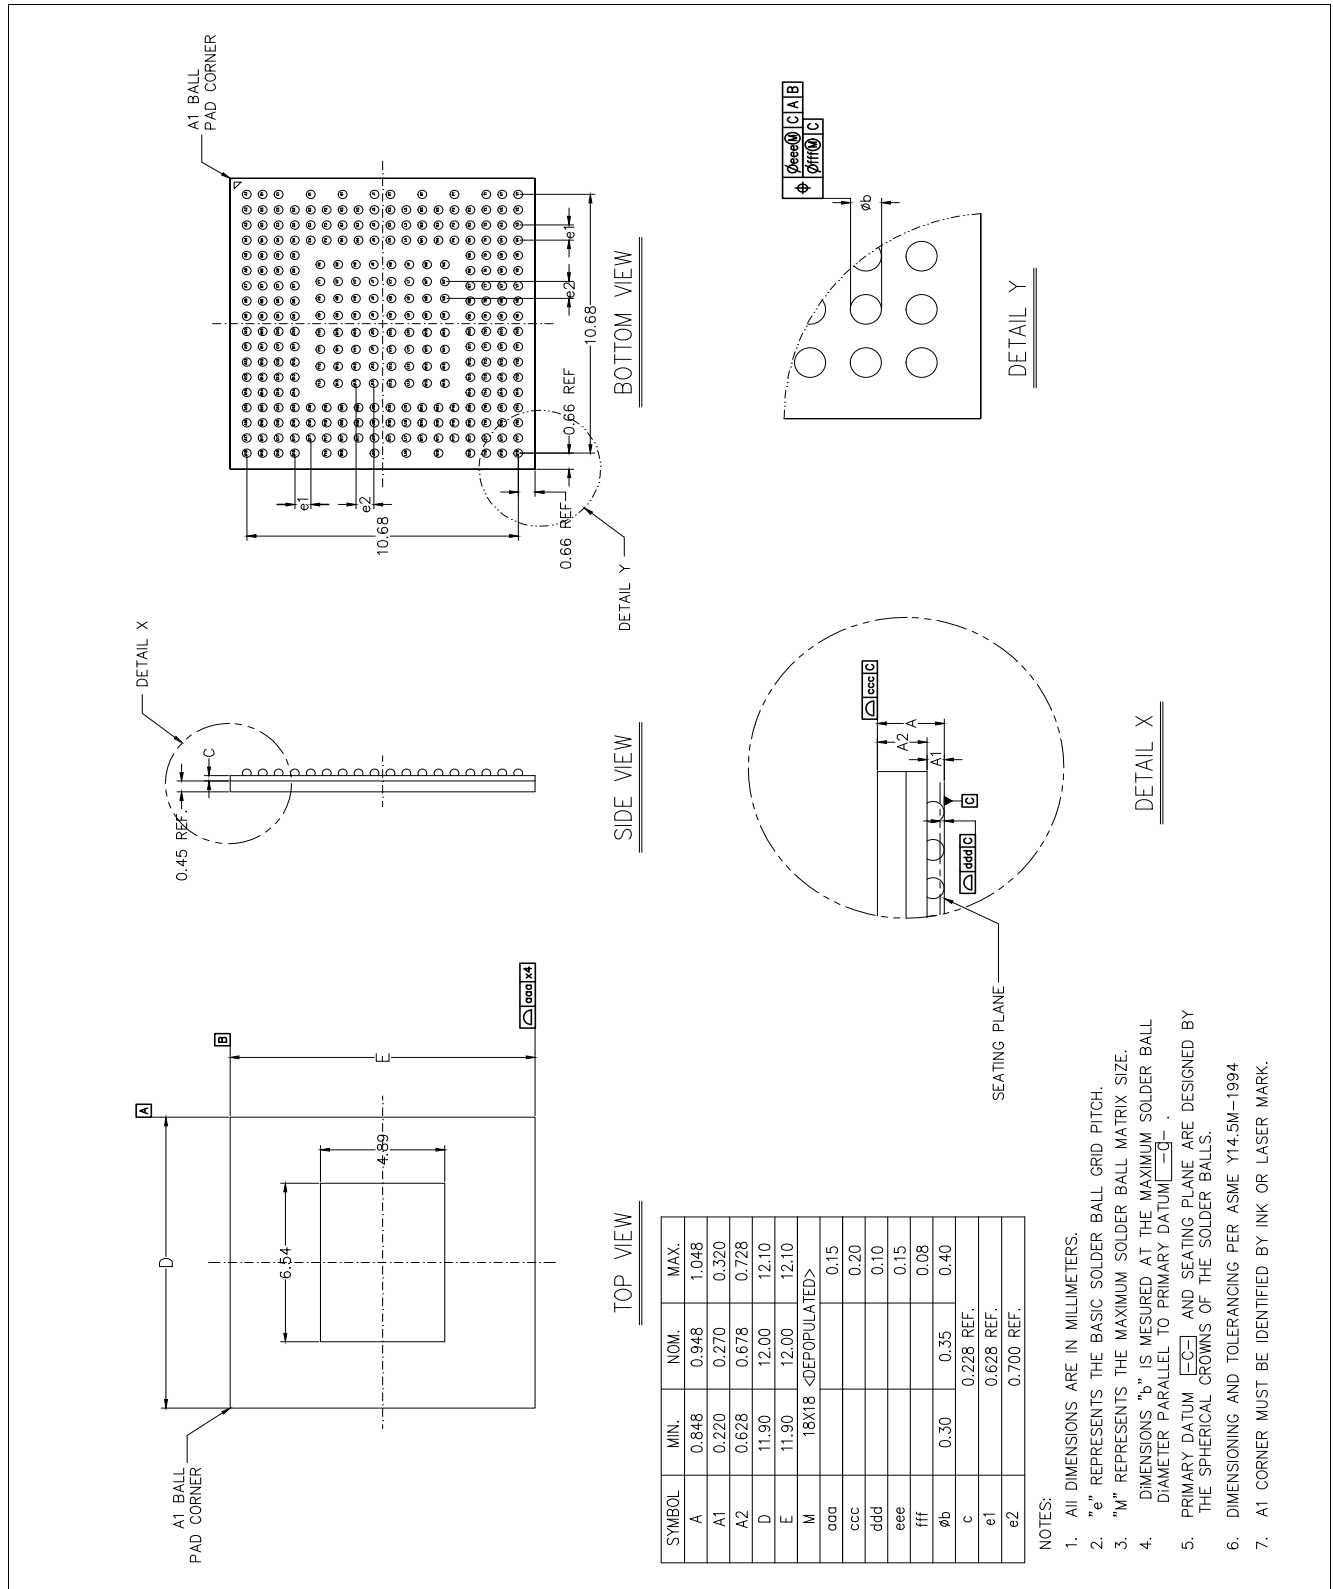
PG-FCLBGA-277 12 mm x 12 mm Package Outline
